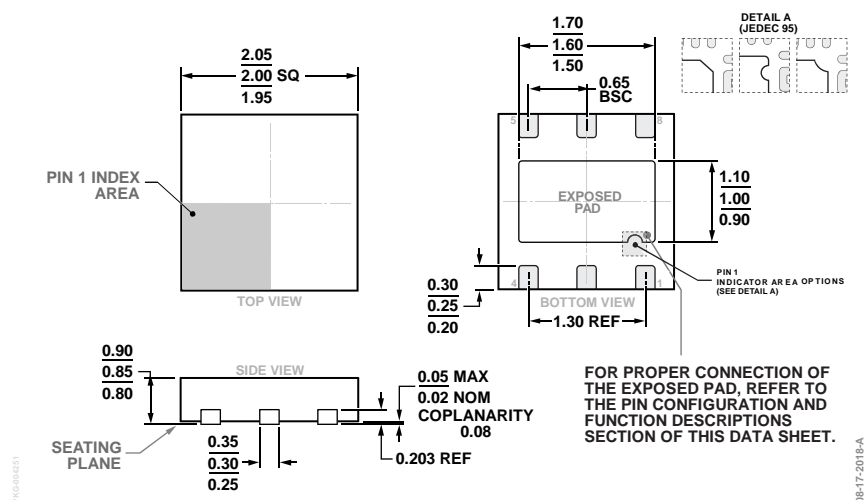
6-Lead Lead Frame Chip Scale Package [LFCSP],
